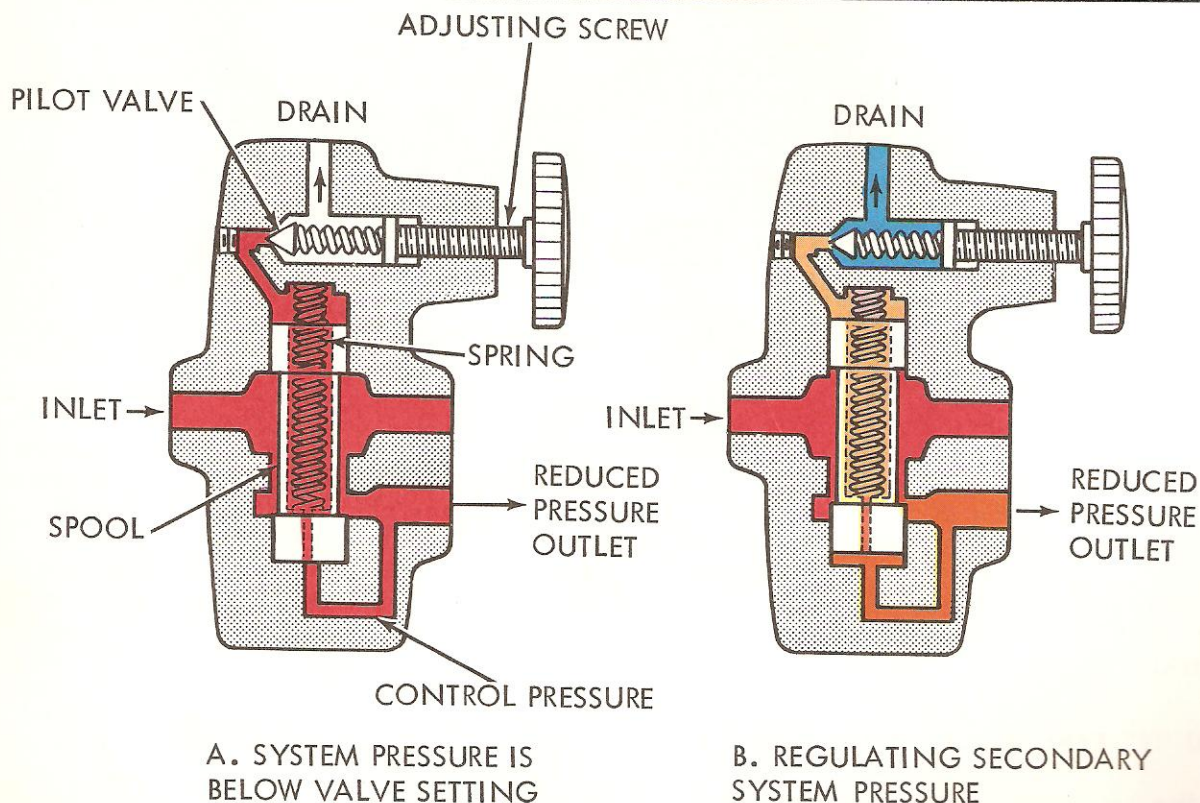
Pilot-Operated Pressure Reducing Valve
